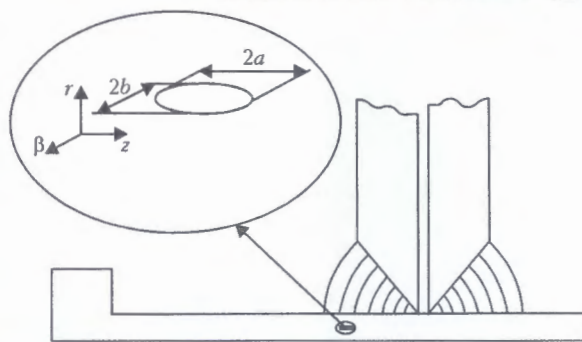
Diagram of lamellar crack in welded joint zone: a, b – dimensions of lamellar crack
